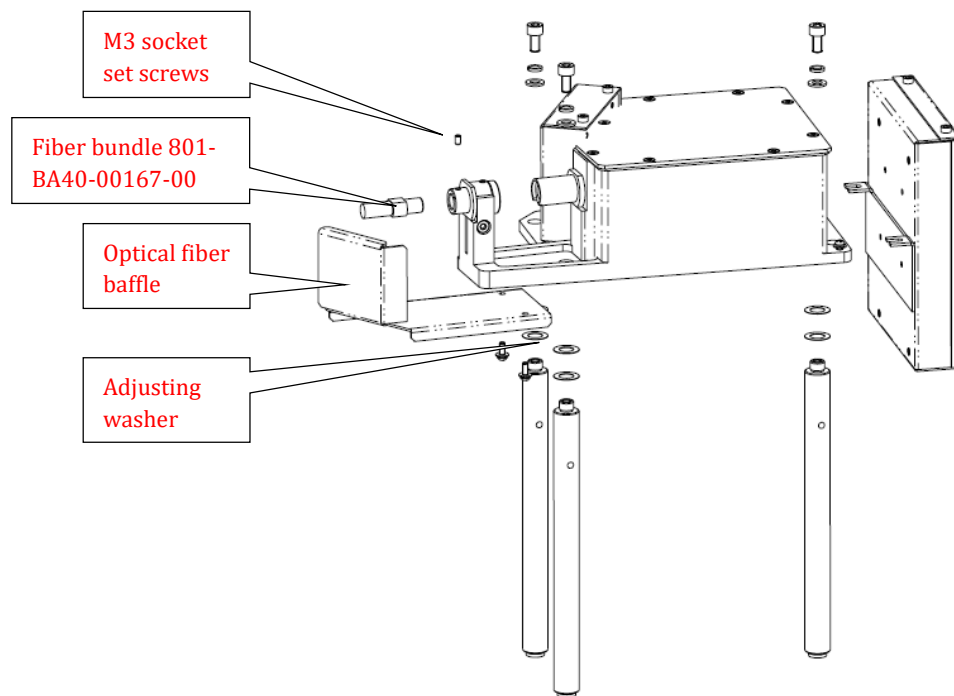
Exploded view of fiber bundle on optical measurement assembly for installation
